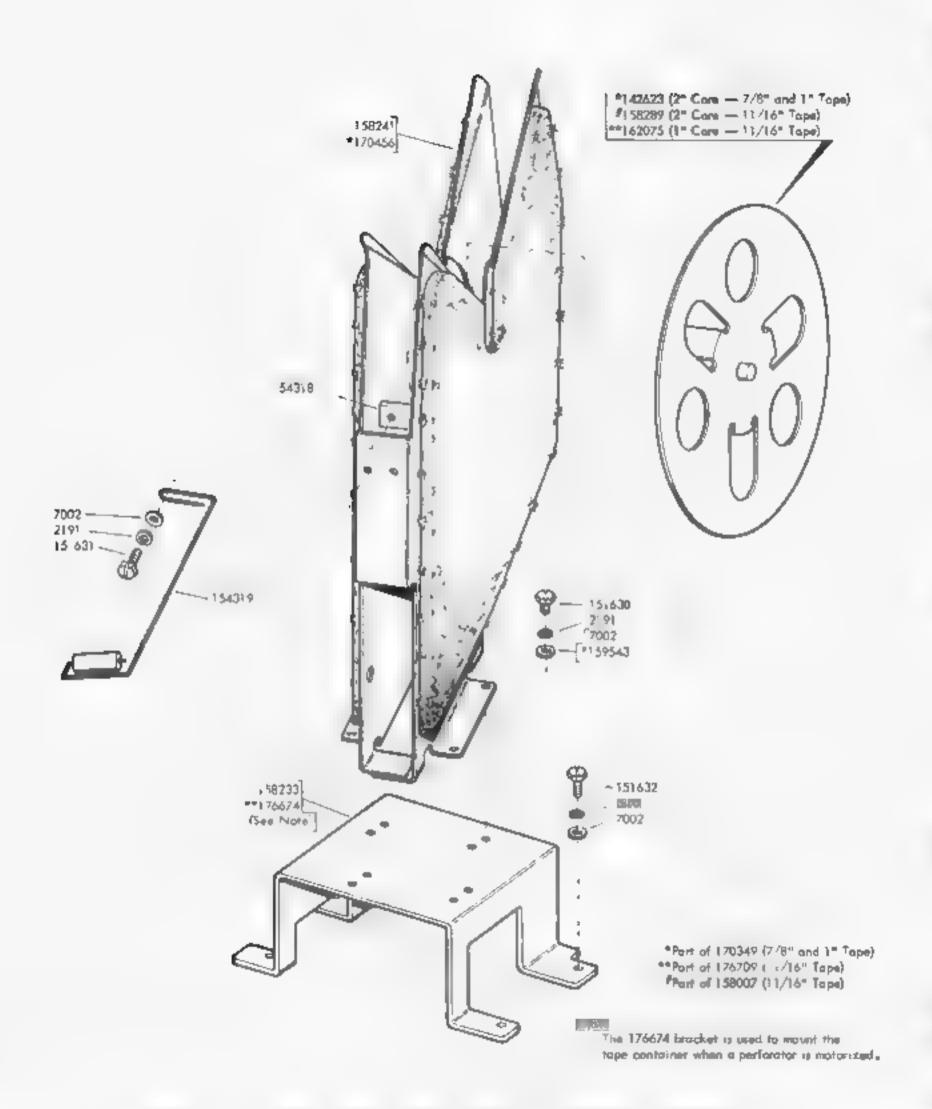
158007, 170349 AND 176709 TAPE CONTAINER ASSEMBLIES
